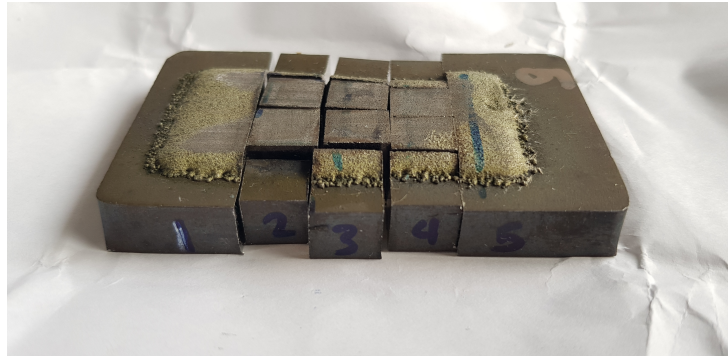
Cutting disk with cutting machine square shape (1 cm²)
